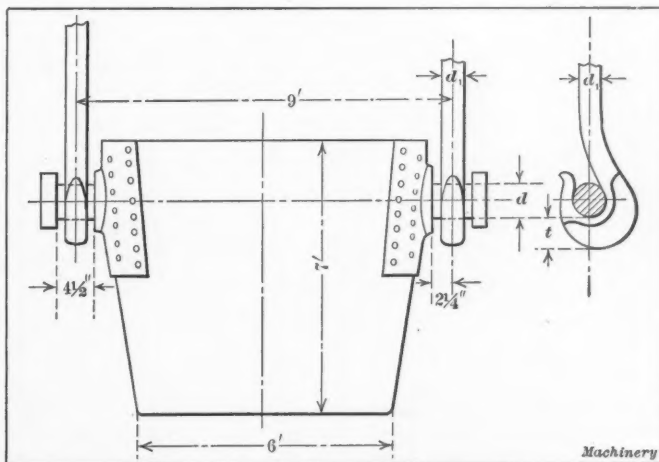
Crane Ladle for which Dimensions of Trunnions and Crane Hooks are required
